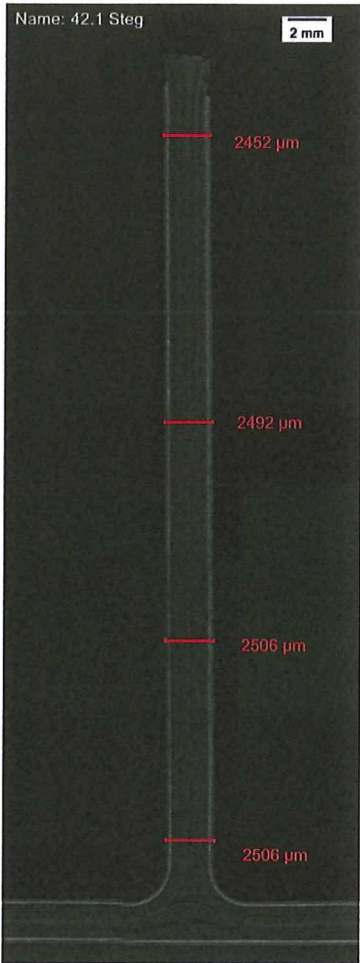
Cross section of panel 13.2 stringer 2 skin
